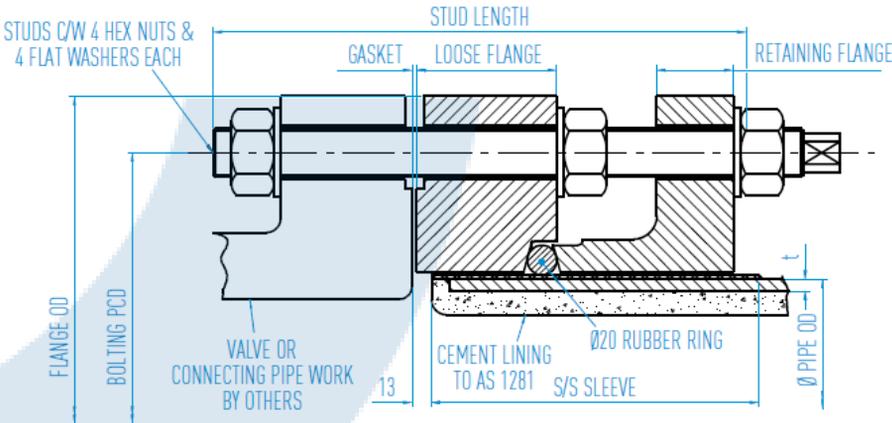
DISMANTLING JOINT – NON THRUST TYPE
